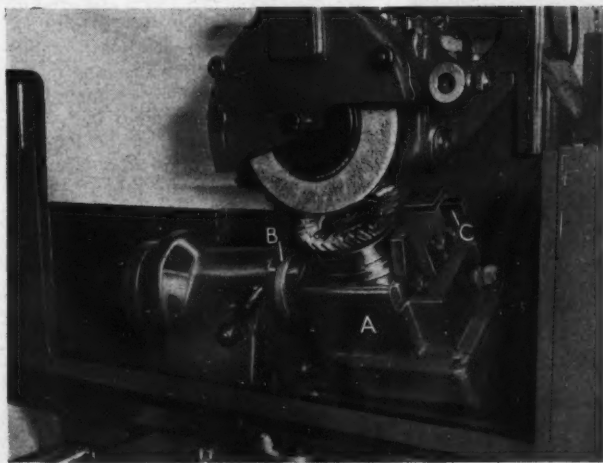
A close-up view of the Jones & Shipman cutter grinding attachment. Indexing movements and down feed of the abrasive wheel are applied automatically during the grinding cycle
